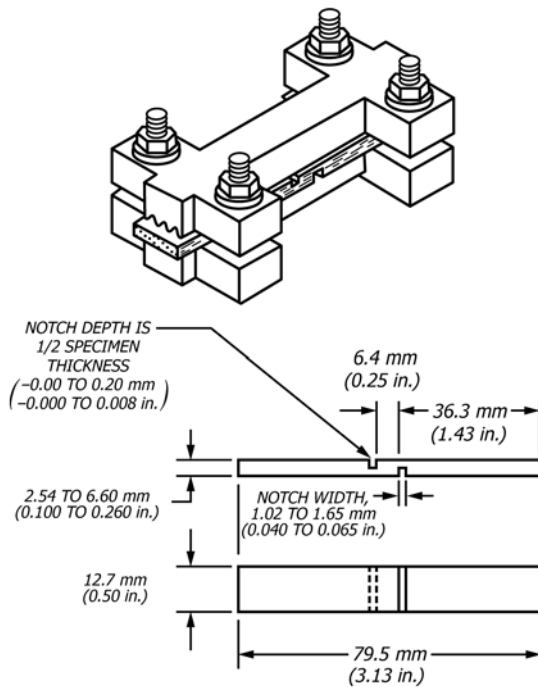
Specimen and Loading Jig for In-Plane Shear Test
